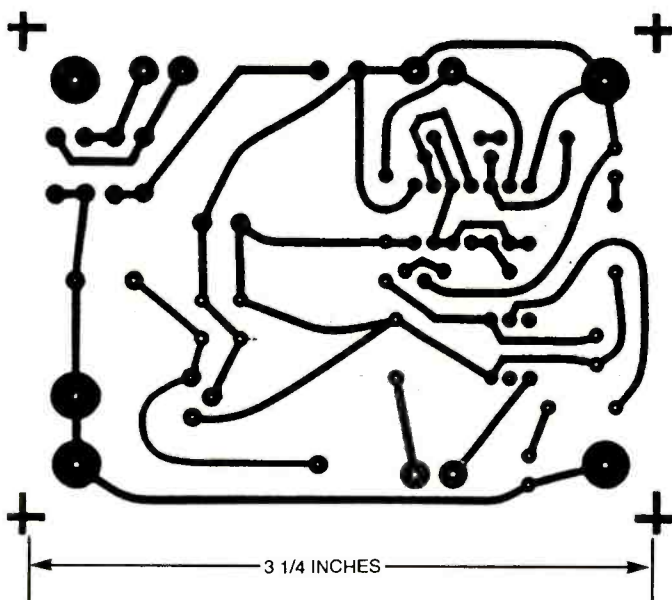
The Sprinkler Guardian II was assembled on a printed-circuit board, measuring 3 1/4 by 2 1/2 inches. A full-size template of the author's printed-circuit layout is shown here.
